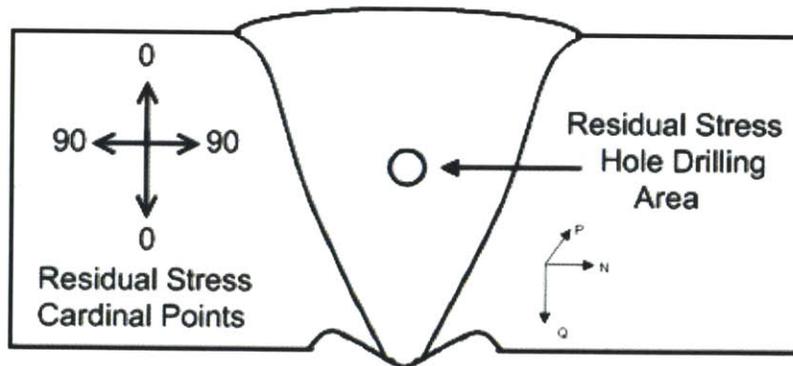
Weld metal showing location of test hole as well as the geometrical residual stress directions.
